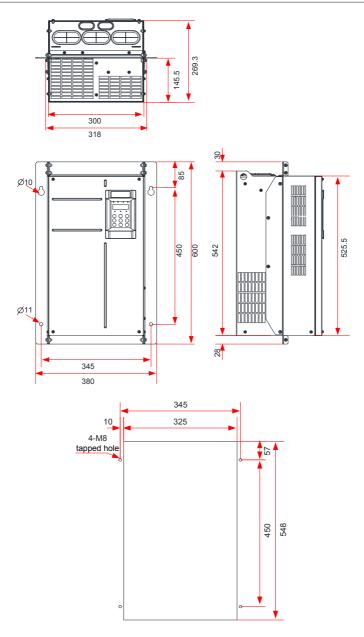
Mounting bracket dimensions and hole spacing for 45–55 kW AC drive models
